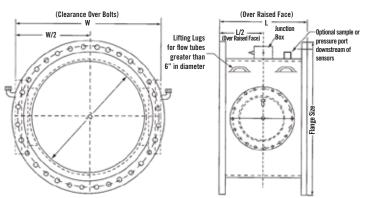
Dimensional Drawings for Metal UniMag (DT)
